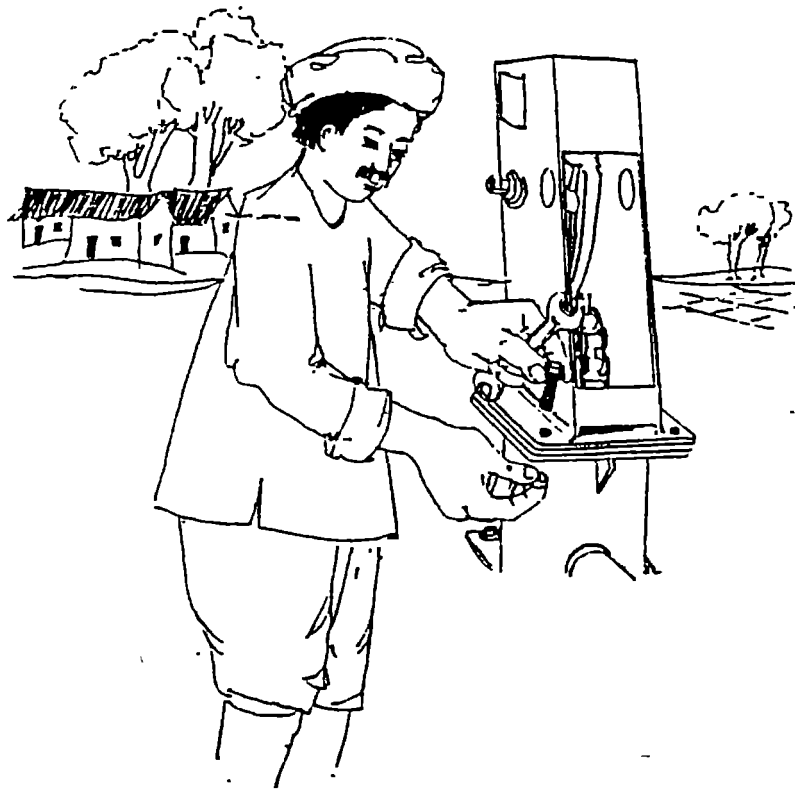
TIGHTEN HEAD ASSEMBLY
